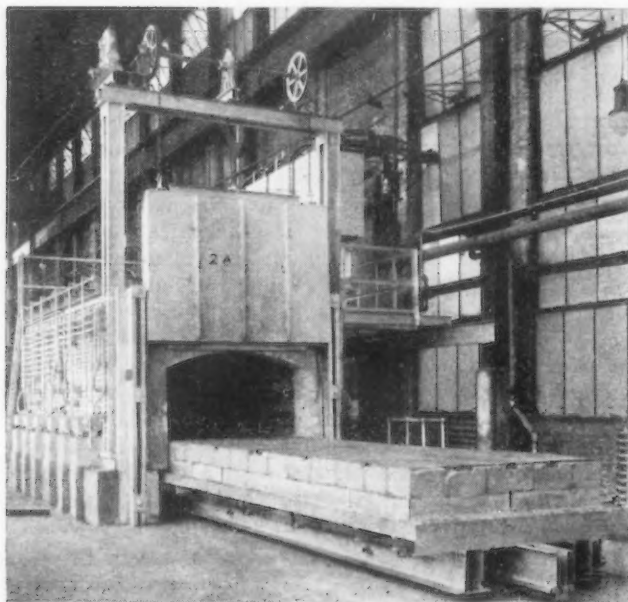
Car-type furnace (at left) with chamber 18 ft. long by 6 ft. wide, for annealing forgings and castings, equipped with a cooling system.
